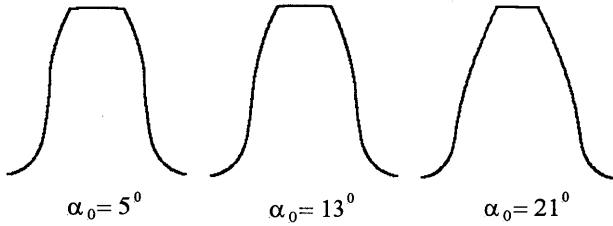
Tooth profile of involute-cycloid composite helical gear ($z=29, a=13\text{mm}$)
